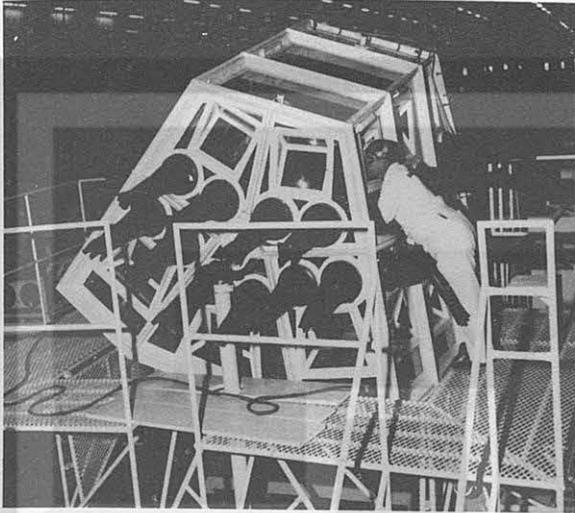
Plexiglas welding boxes.
